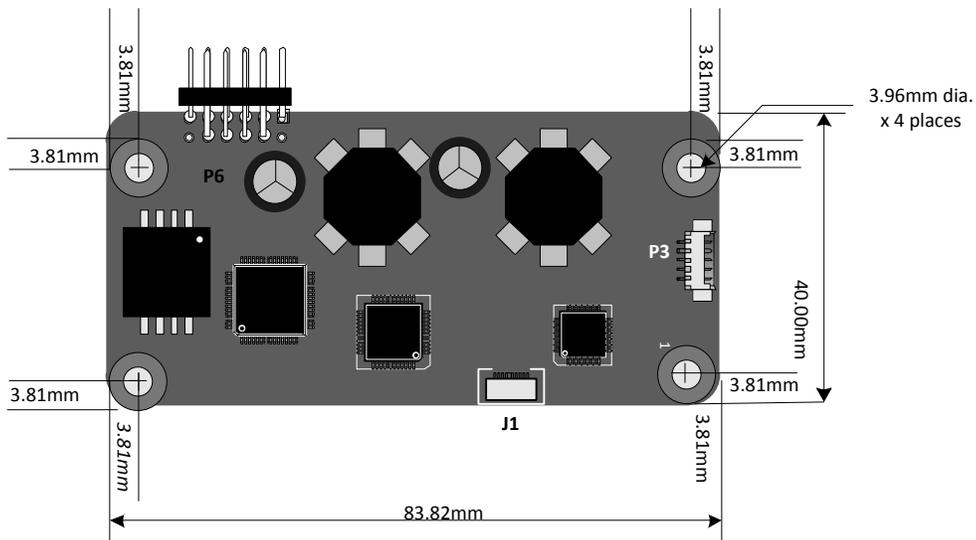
2520 Dimensions (CTR-252000-IT-USB-00-R)
